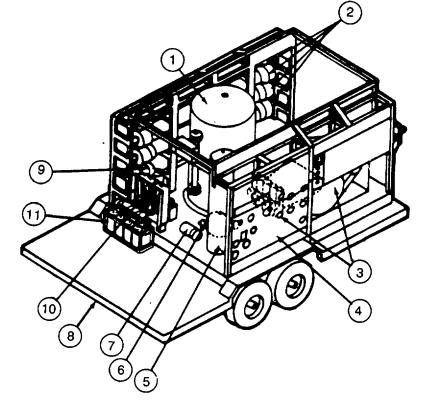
ROWPU - Generator Removed (Rear View) NOTE
